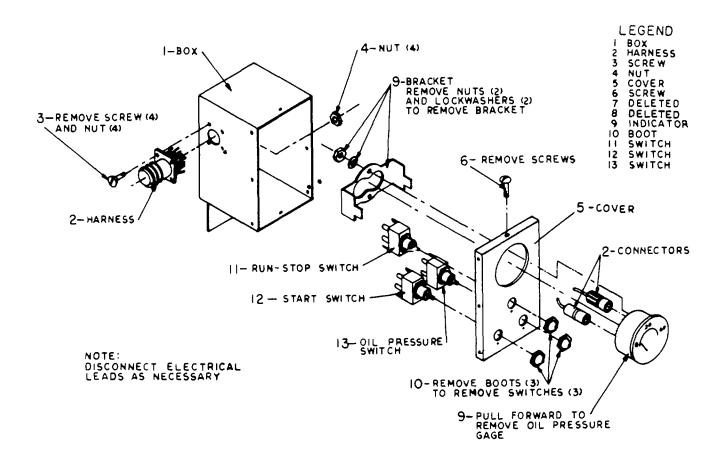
A. Control Panel-Disassembly and Reassembly (serial No. N-354 thru N-419)
